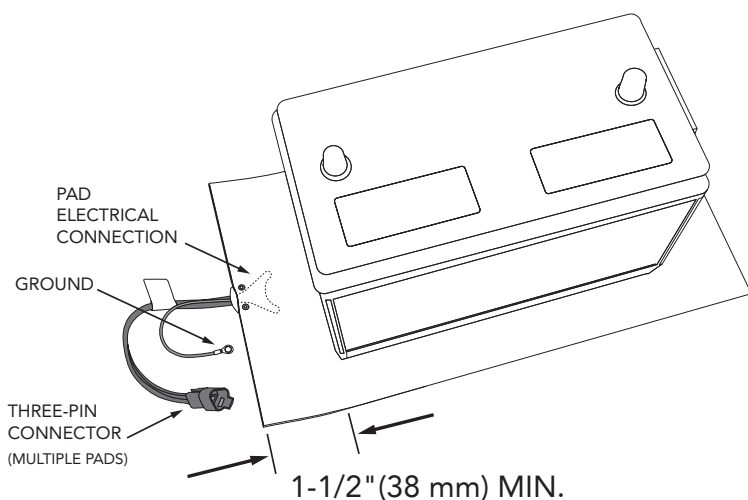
Battery pad installation, showing minimum 1-1/2 inch (38 mm) clearance between battery and pad edge.
